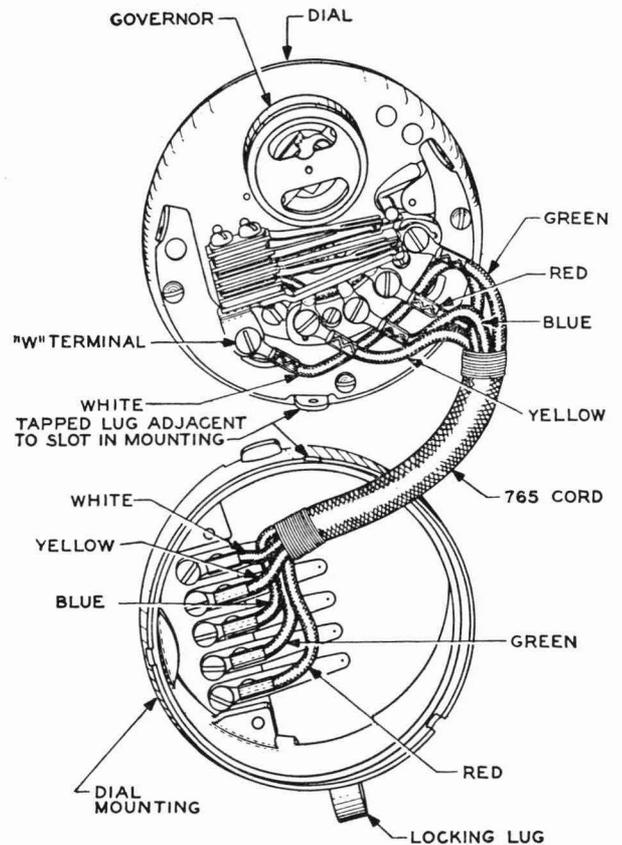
Method of Cording Dial Mountings and Dials Having the W Terminal as Part of the Contact Spring Assembly, Using No. 765 and Similar Cords
